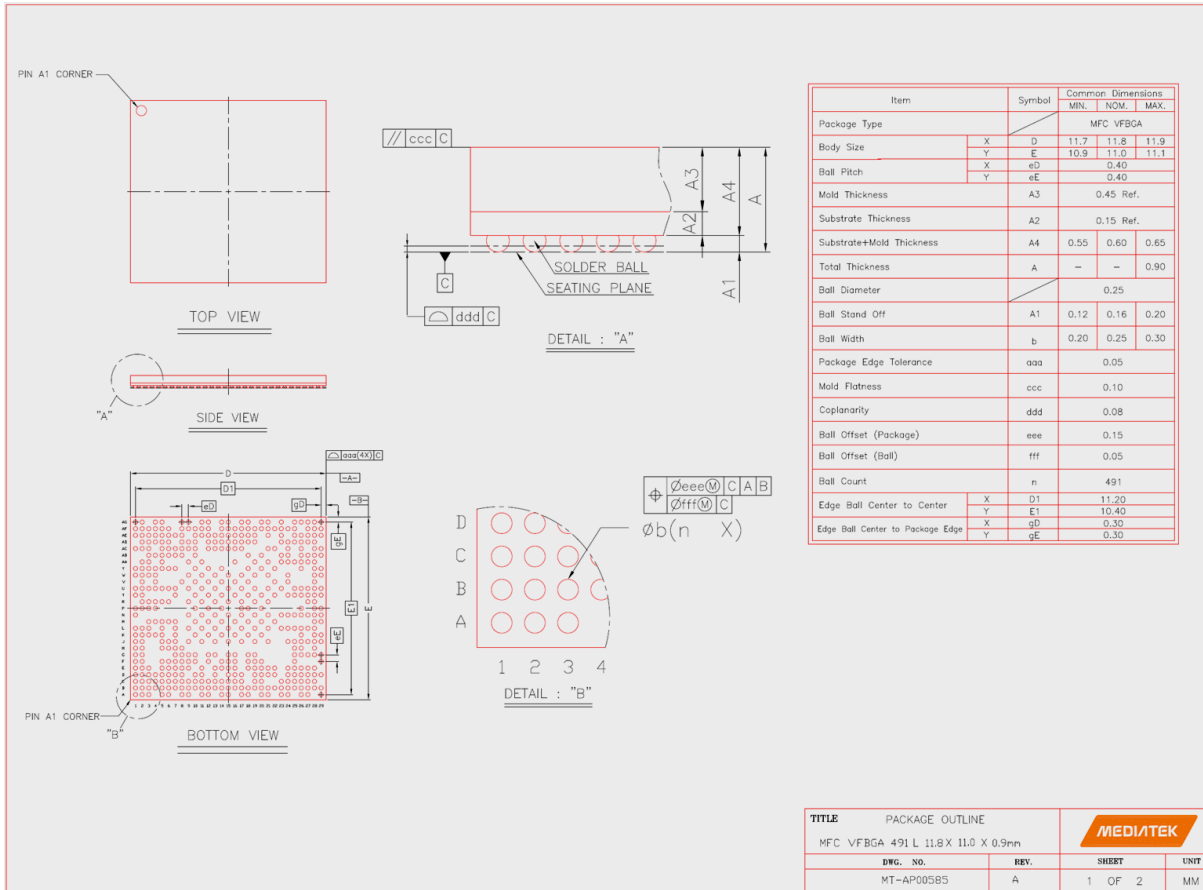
Outlines and dimensions of VFBGA 11.8mm*11.0mm, 491 balls, 0.4mm pitch package
